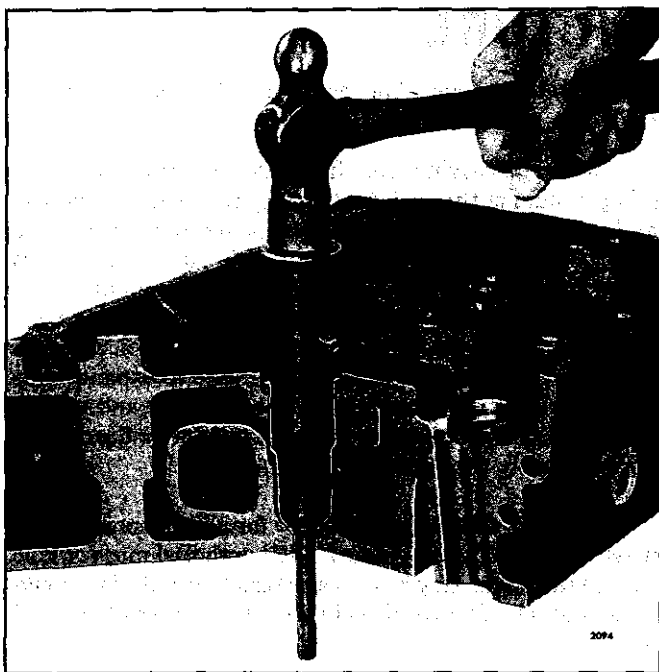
Installing Injector Tube Using Tools J 5286-4A and J 5286-5
